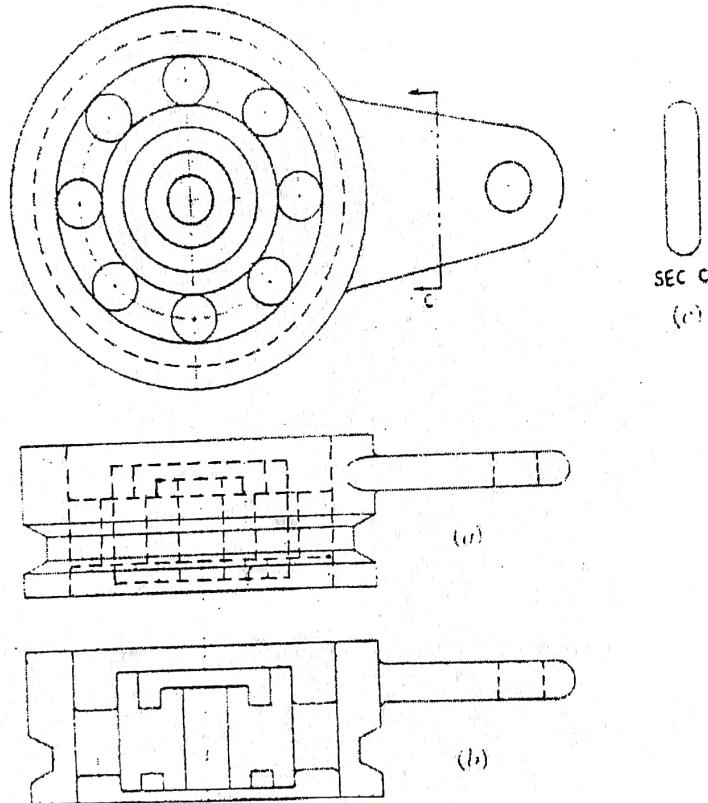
Advantage of sectional views. (a) Orthographic view with hidden edges indicated by dashed lines; (b) the same view but made as a section to clarify the shape; (c) cross-sectional shape of lug shown by removing section.
